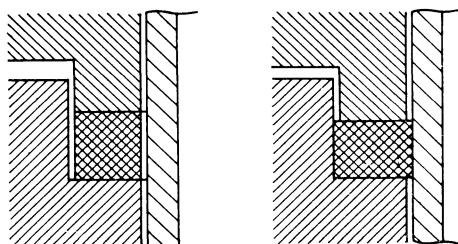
Cylindrical seal; (a) uncompressed; (b) compressed
